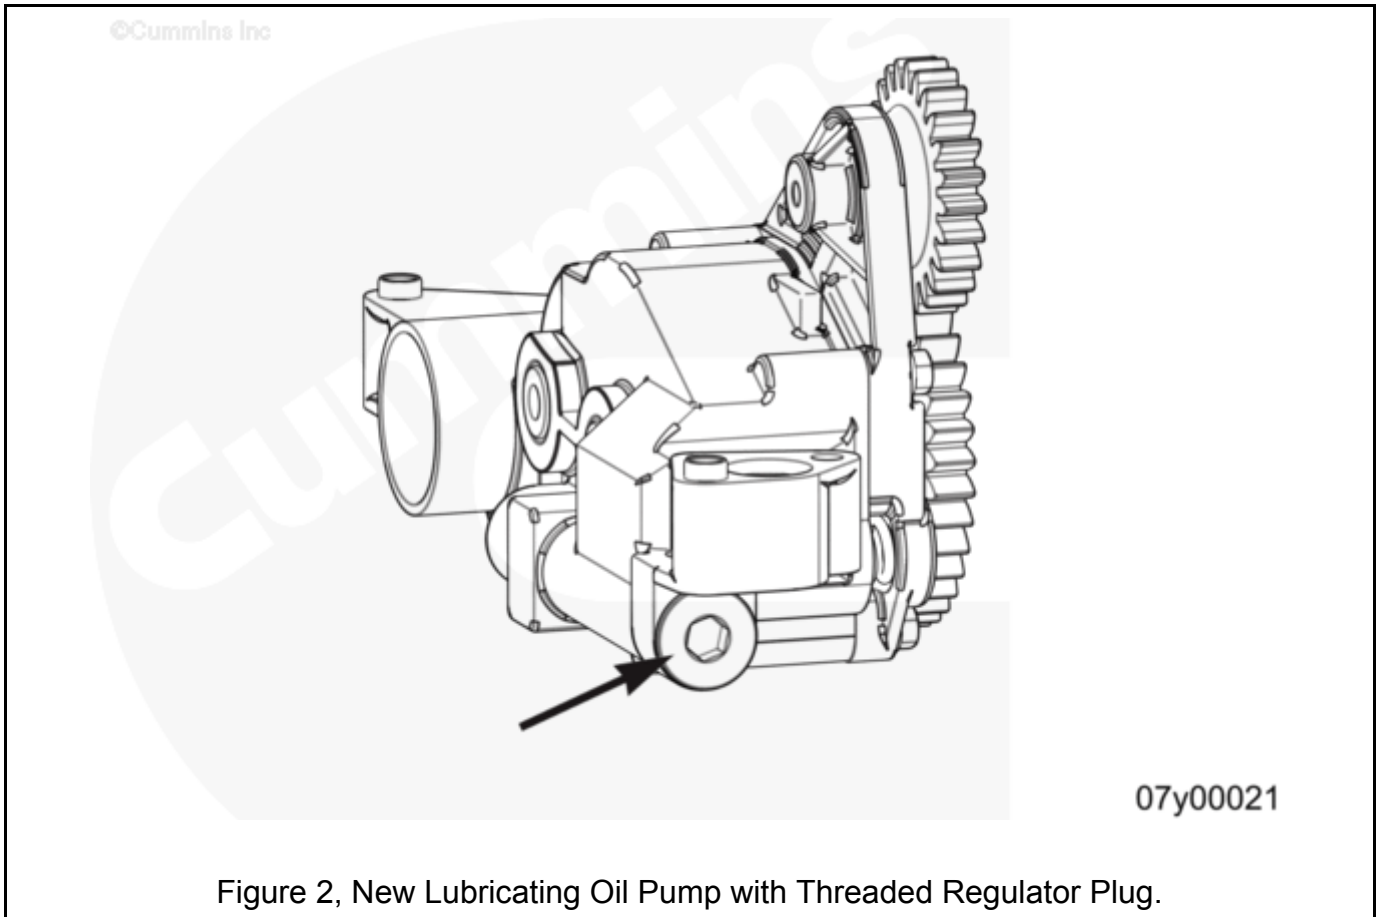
, New Lubricating Oil Pump with Threaded Regulator Plug.
